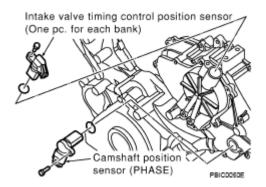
Identifying Intake Valve Timing Control Position Sensor
